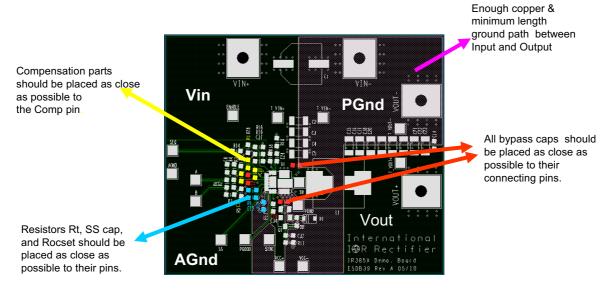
IRDC3859 demoboard layout considerations – Top Layer
